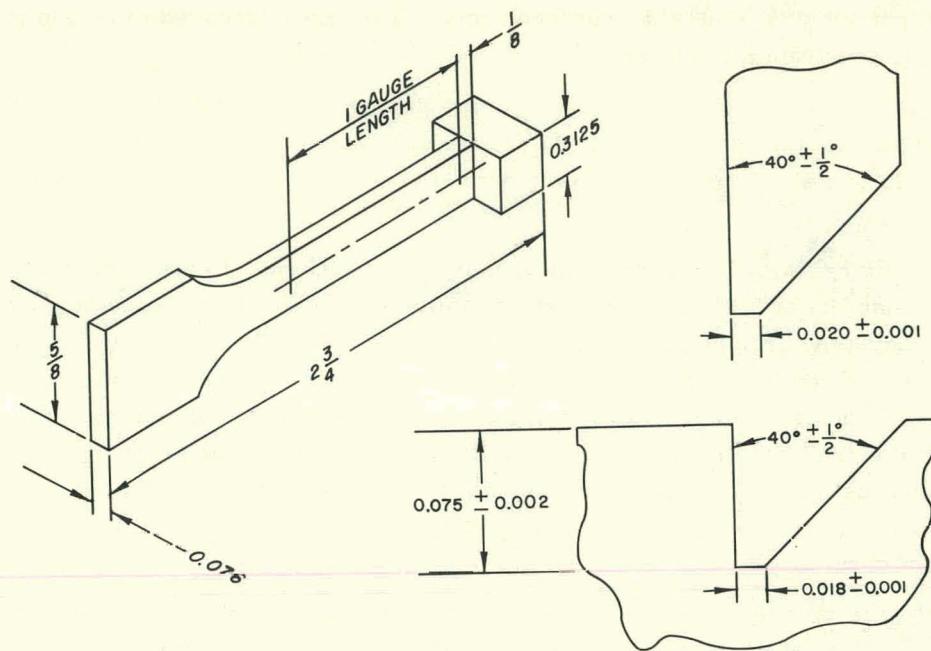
Simulated Fuel Plate to Grooved Side Plate Joint and Tensile Specimen; All Dimensions in Inches
